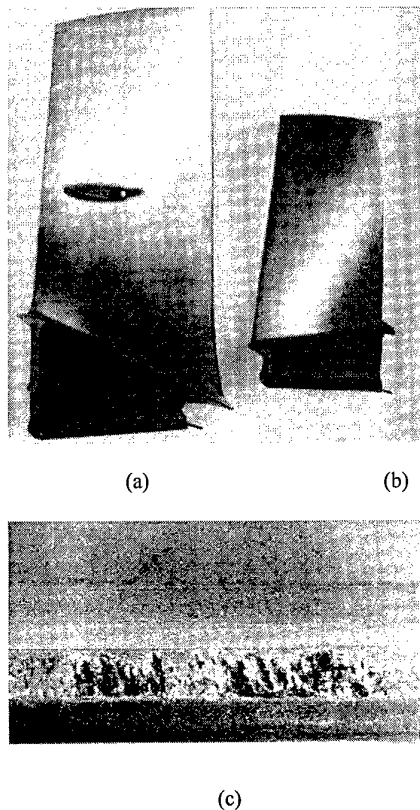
Areas (small arrows) of (a) fan blades and (b) compressor blades subject to fretting fatigue damage in a CF fighter engine; (c) Close up of dovetail region of the compressor blade showing deep fretting scar [16].
